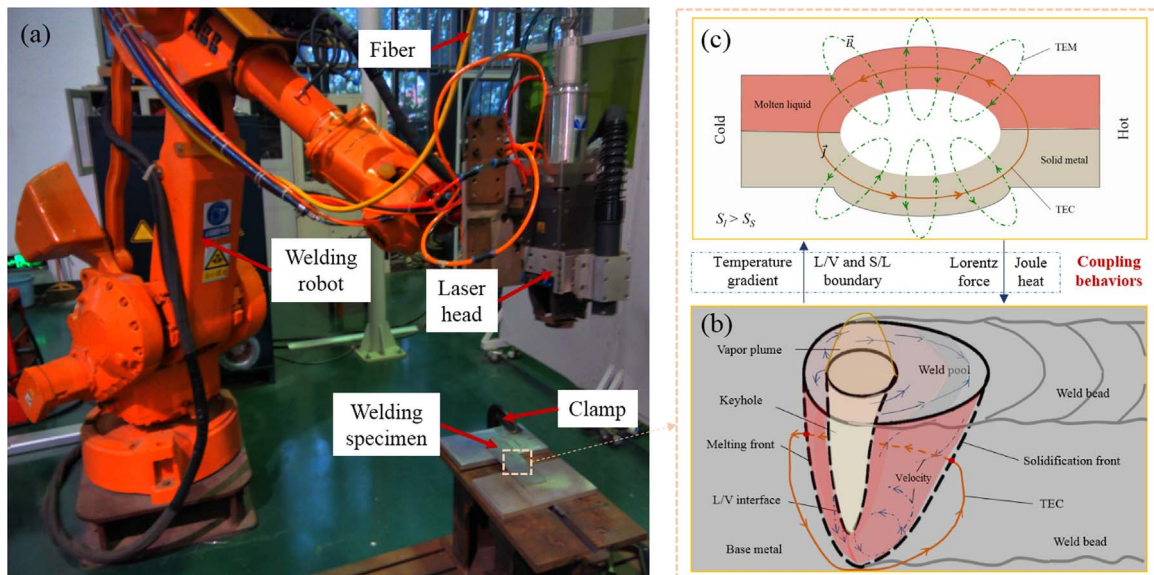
Experimental setup and physical phenomena for fiber laser welding: (a) welding equipment; (b) dynamic behaviors of keyhole, weld pool and vapor plume in the keyhole; (c) the principle of the production of thermoelectric magnetic phenomena in weld pool; the coupling behaviors including the production of TEC and their effects on welding process is also shown between (b) and (c).
